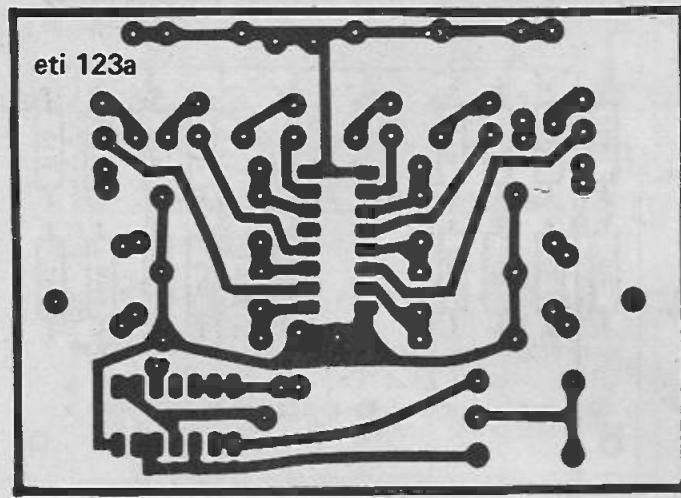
Printed-circuit board layout — ETI 123a. Full size 88 x 63 mm. Fig. 7. Printed-circuit board layout — ETI 123b. Full size 88 x 71 mm.
